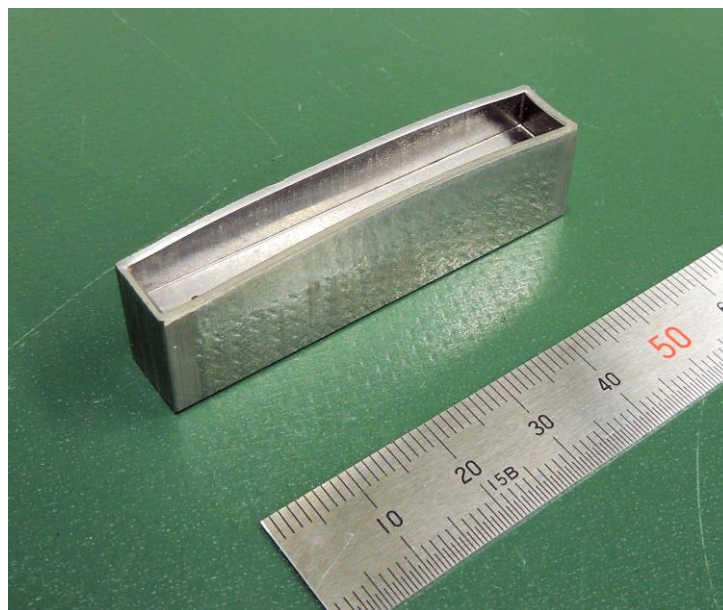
An example of sintered and cold-forged specimen.
